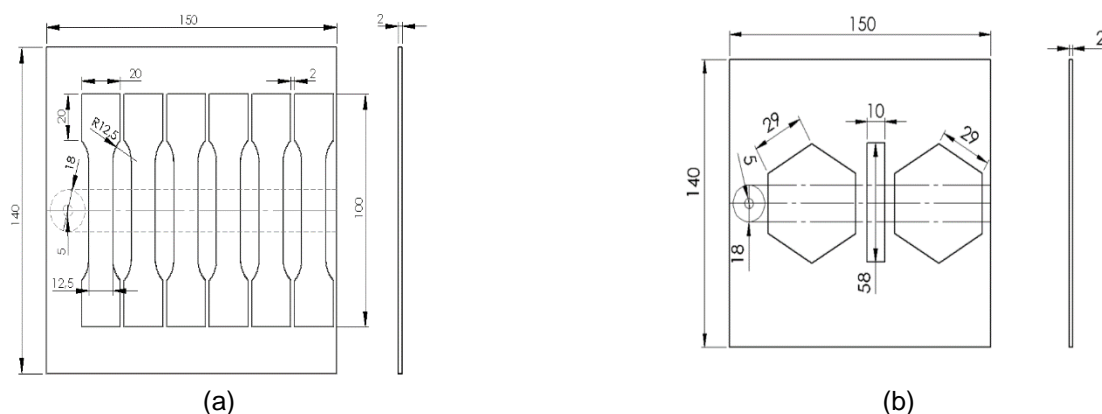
Scheme for extracting test coupons from the friction-stir-welded aluminum alloy plates a) Tensile test coupon, b) Disc pressure test coupon
